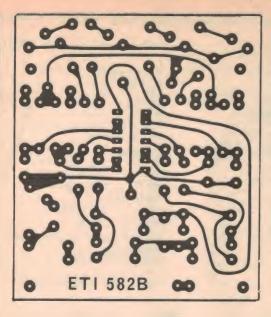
PC board layout of board 'B'. Full size $75 \times 65 \text{ mm}$.
